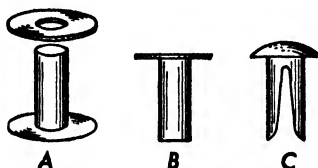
Styles of leather rivets: A, solid rivet with burr; B, tubular rivet; C, split rivet.
